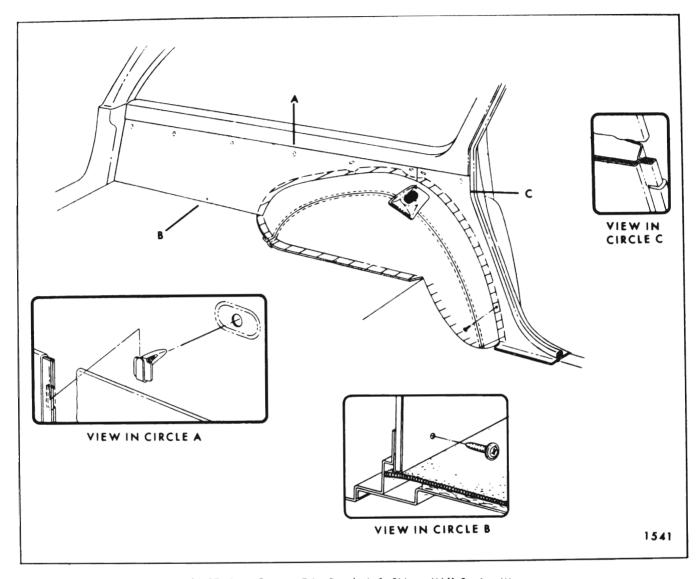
Rear Quarter Trim Panel, Left Side - "A" Station Wagons
